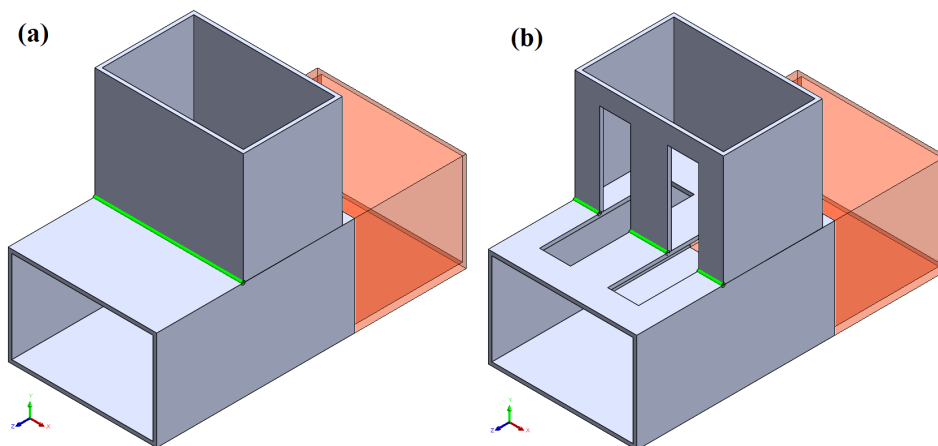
T-joint specimen manufacturing steps: (a) MIG welding, (b) EDM cutting
